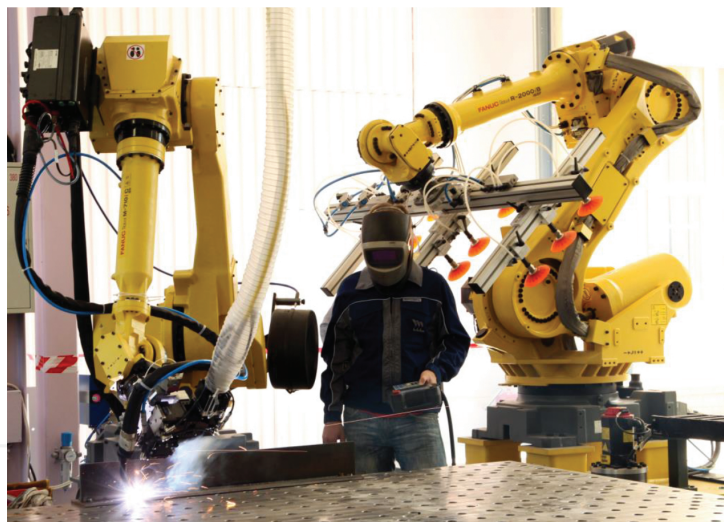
Robot-based HLAW machine on the base of 25 kW fiber laser.
